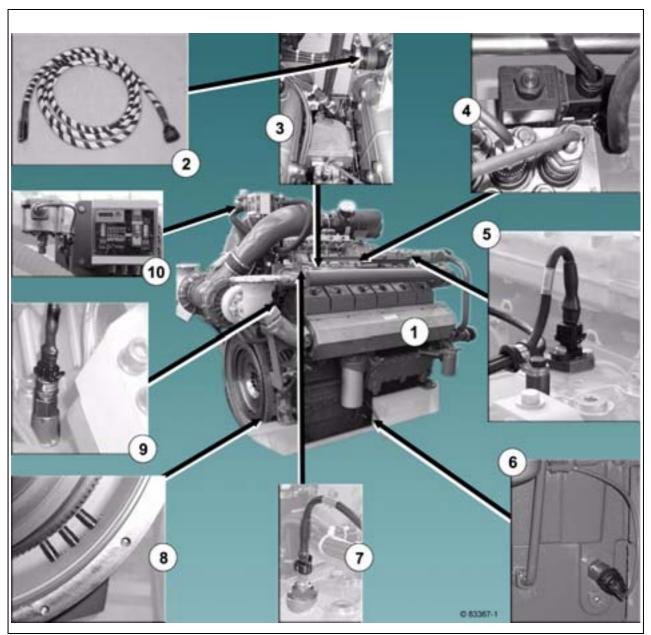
EMR2, engine side installations (example: TBD 616 V12)
